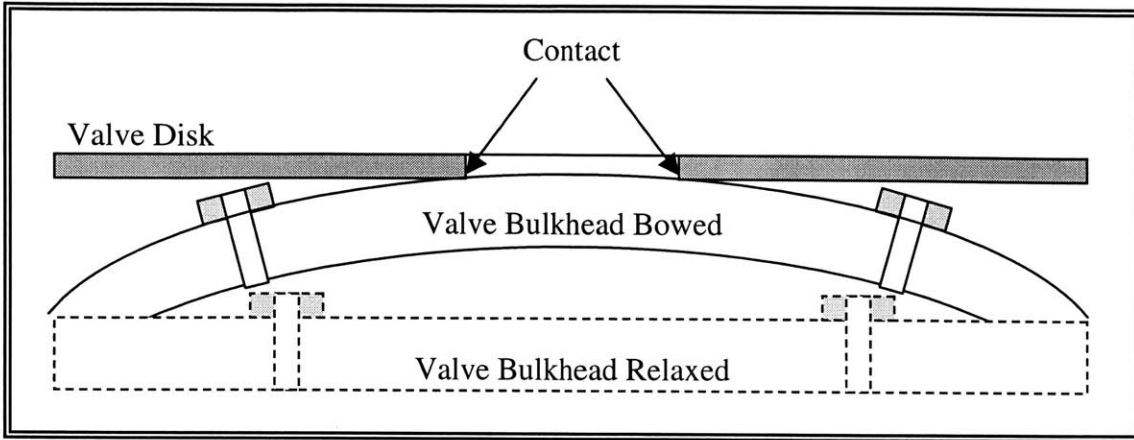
Bowing with its center upwards, the valve bulkhead contacts the valve disk retarding sealing. This type of contact can only occur with the outlet valve
